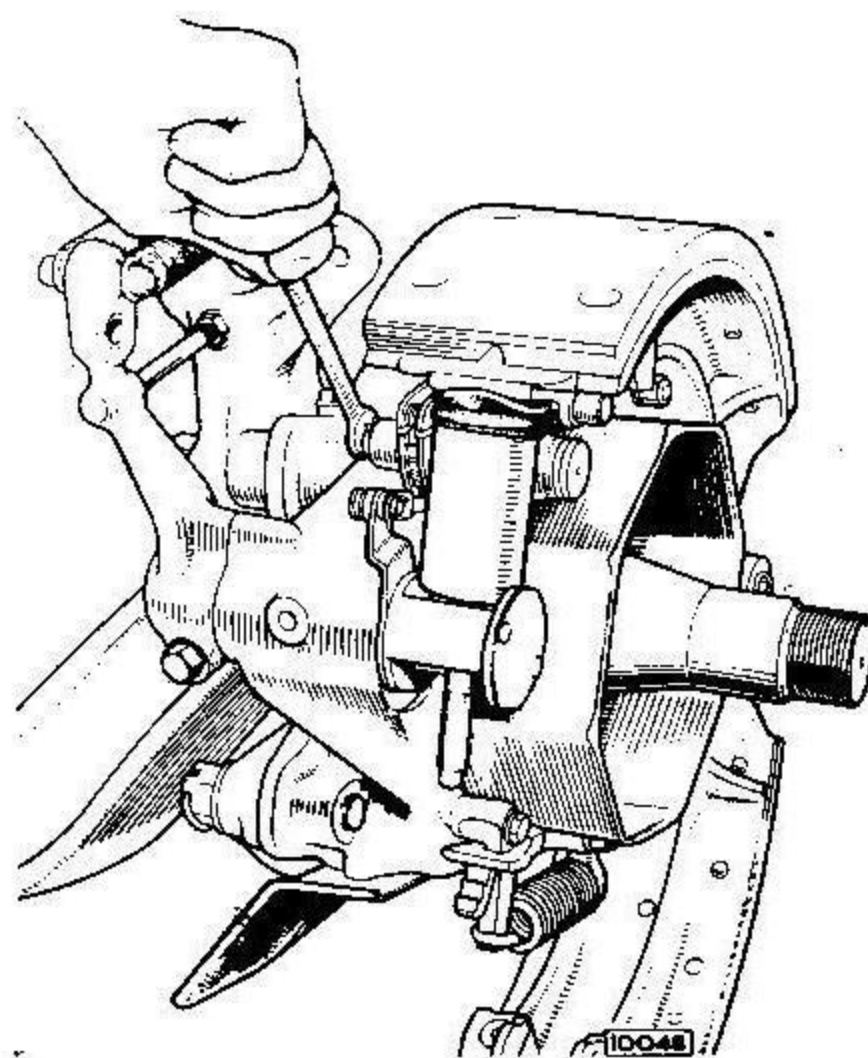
Method of adjusting for balance (the brake drum is removed for clarity)
